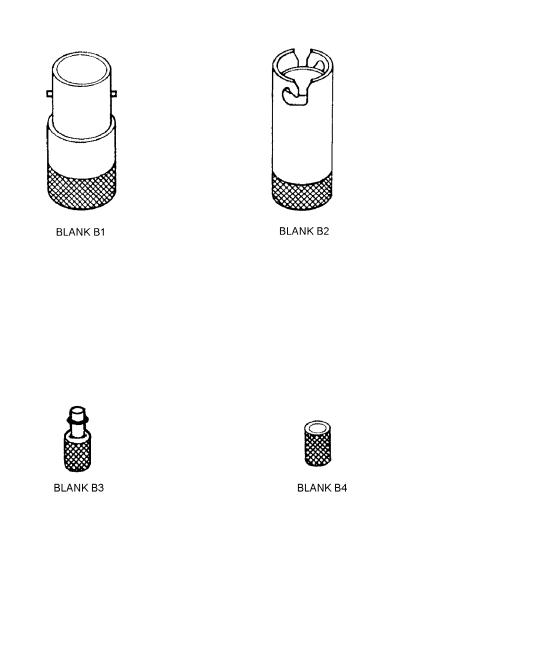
Respirator Assembly Test Set - A/E47T-28
